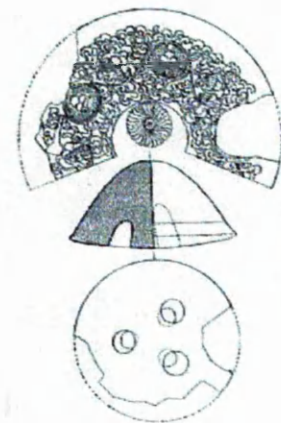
Hump mould for impressing a complex design on the inner surface of a bowl
